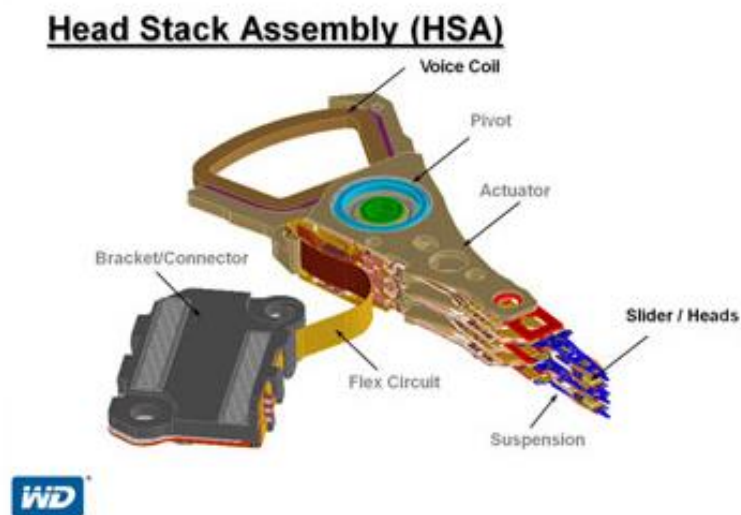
Components of a Head Stack Assembly (HSA) [10].
